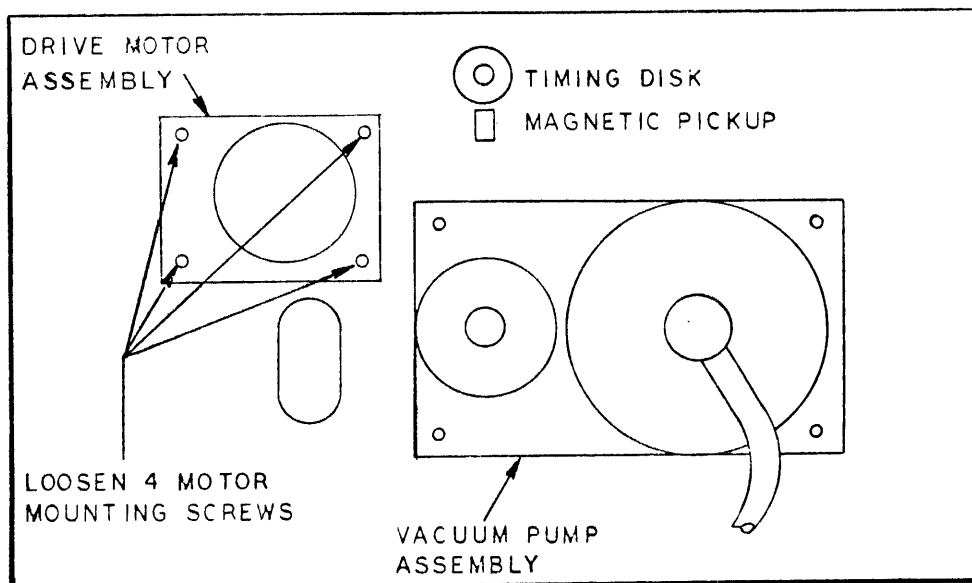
Drive Motor, Magnetic Pickup, and Vacuum Pump, Top Plate Assembly
